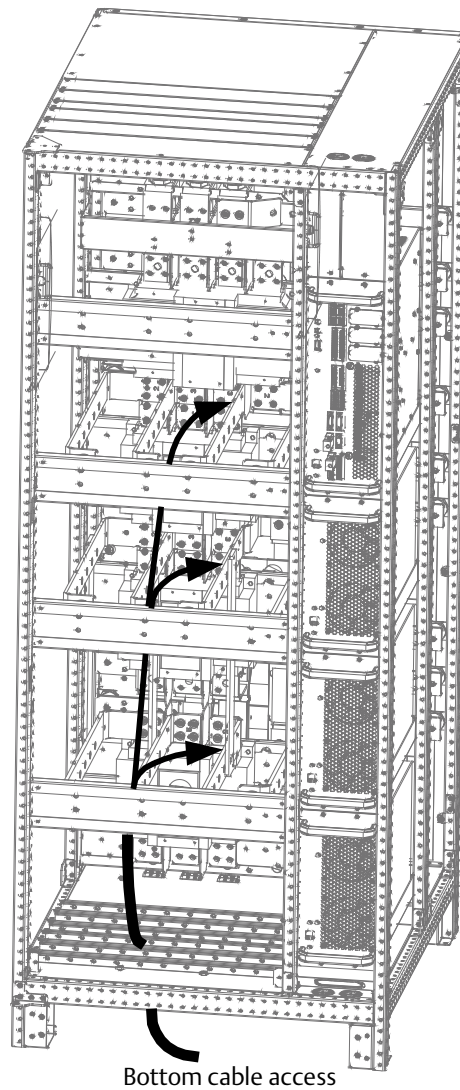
Power cables wiring route of 600kVA (bottom cable access)
